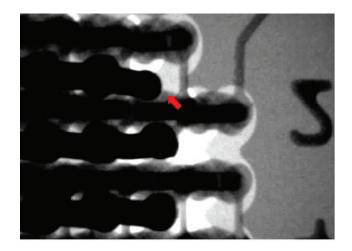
X-radiograph of CGA mounted on PCB showing insufficient solder: Reject
